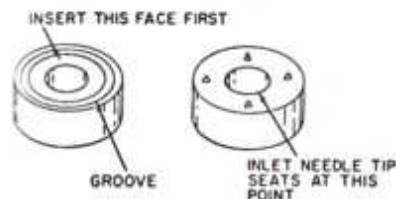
The Viton seat used on some Tecumseh carburetors must be installed correctly to operate properly. All metal needle is used with seat shown.
